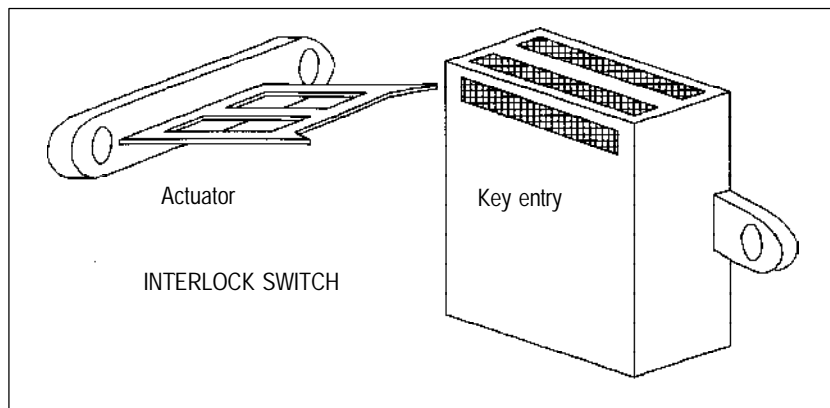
The unusual key operates a rotary cam inside each of the openings. Each cam operates switch contacts.
